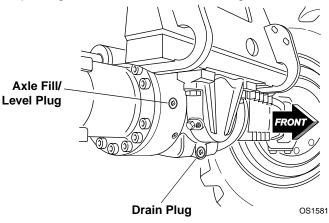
Axle fill/level plug (front axle shown; rear axle similar).
